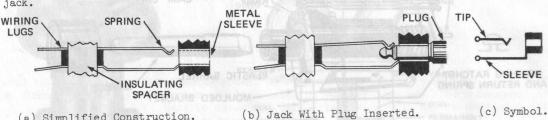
TWO-POINT SWITCHBOARD JACK.
